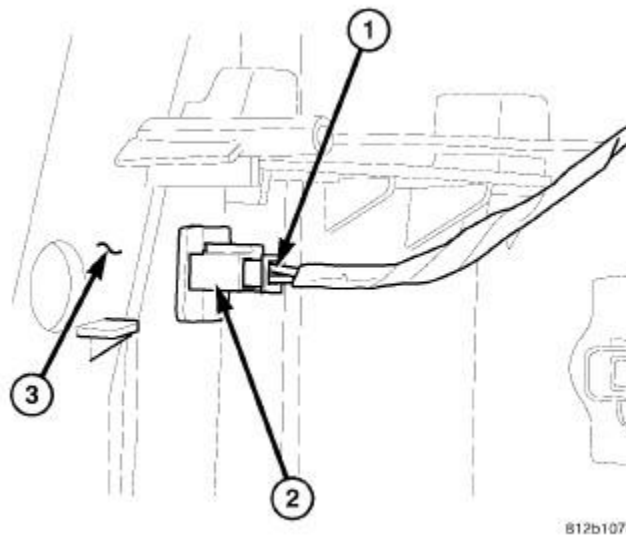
Evap Temperature Sensor, Connector & HVAC Housing
